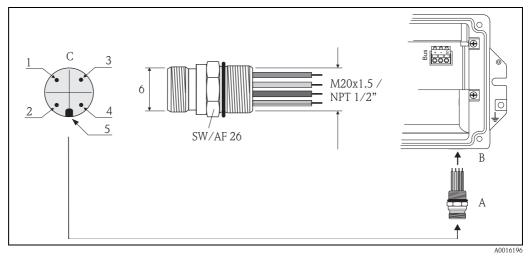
Connectors for connecting to the FOUNDATION Fieldbus<sup>TM</sup>
